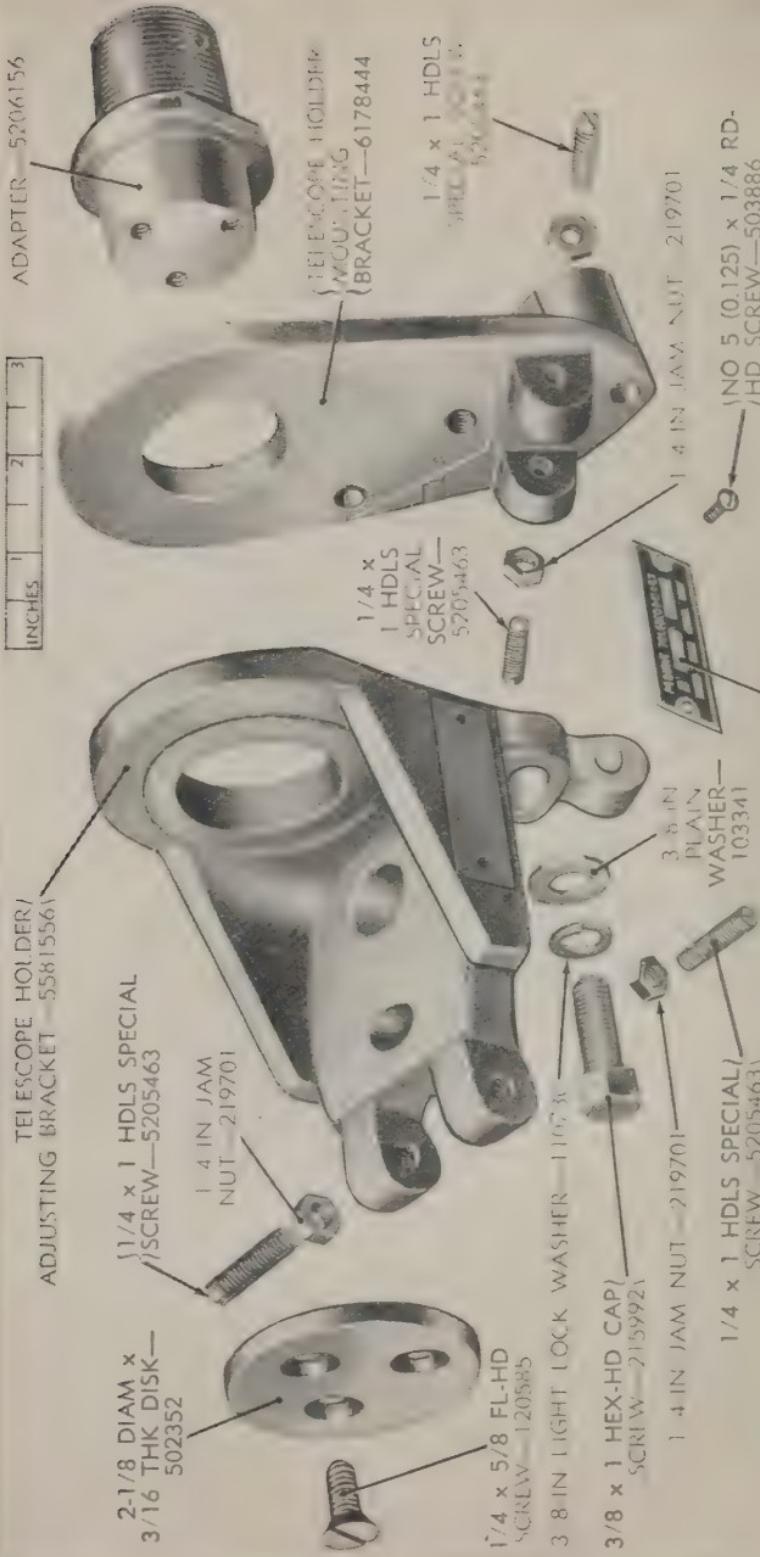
Telescope mount M42—removal of the telescope holder assembly and related parts—exploded view.
